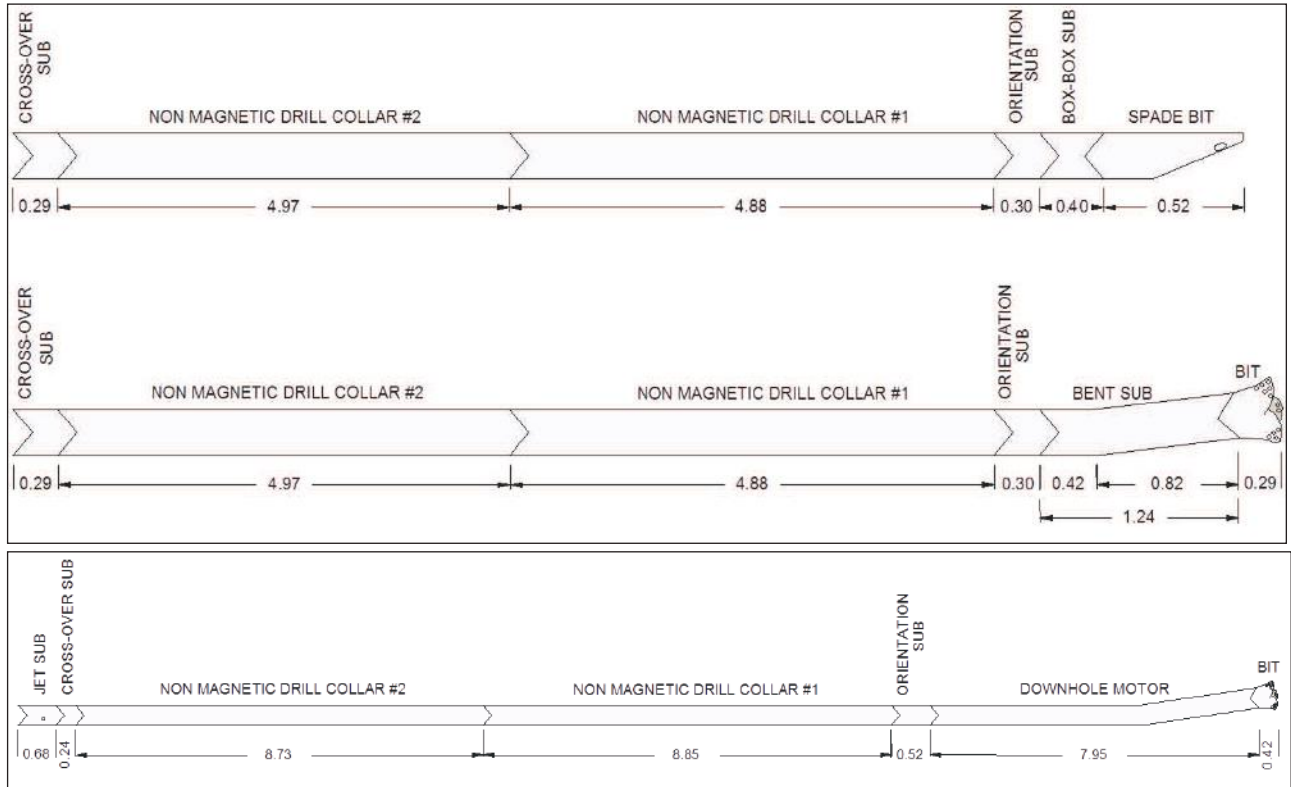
Example drilling assemblies; Jetting assembly with spade bit at top, jetting assembly with tri-cone bit in centre, and downhole motor assembly with tri-cone bit at bottom.
